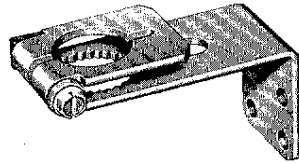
Universal mounting bracket No. BKT16A-600.
